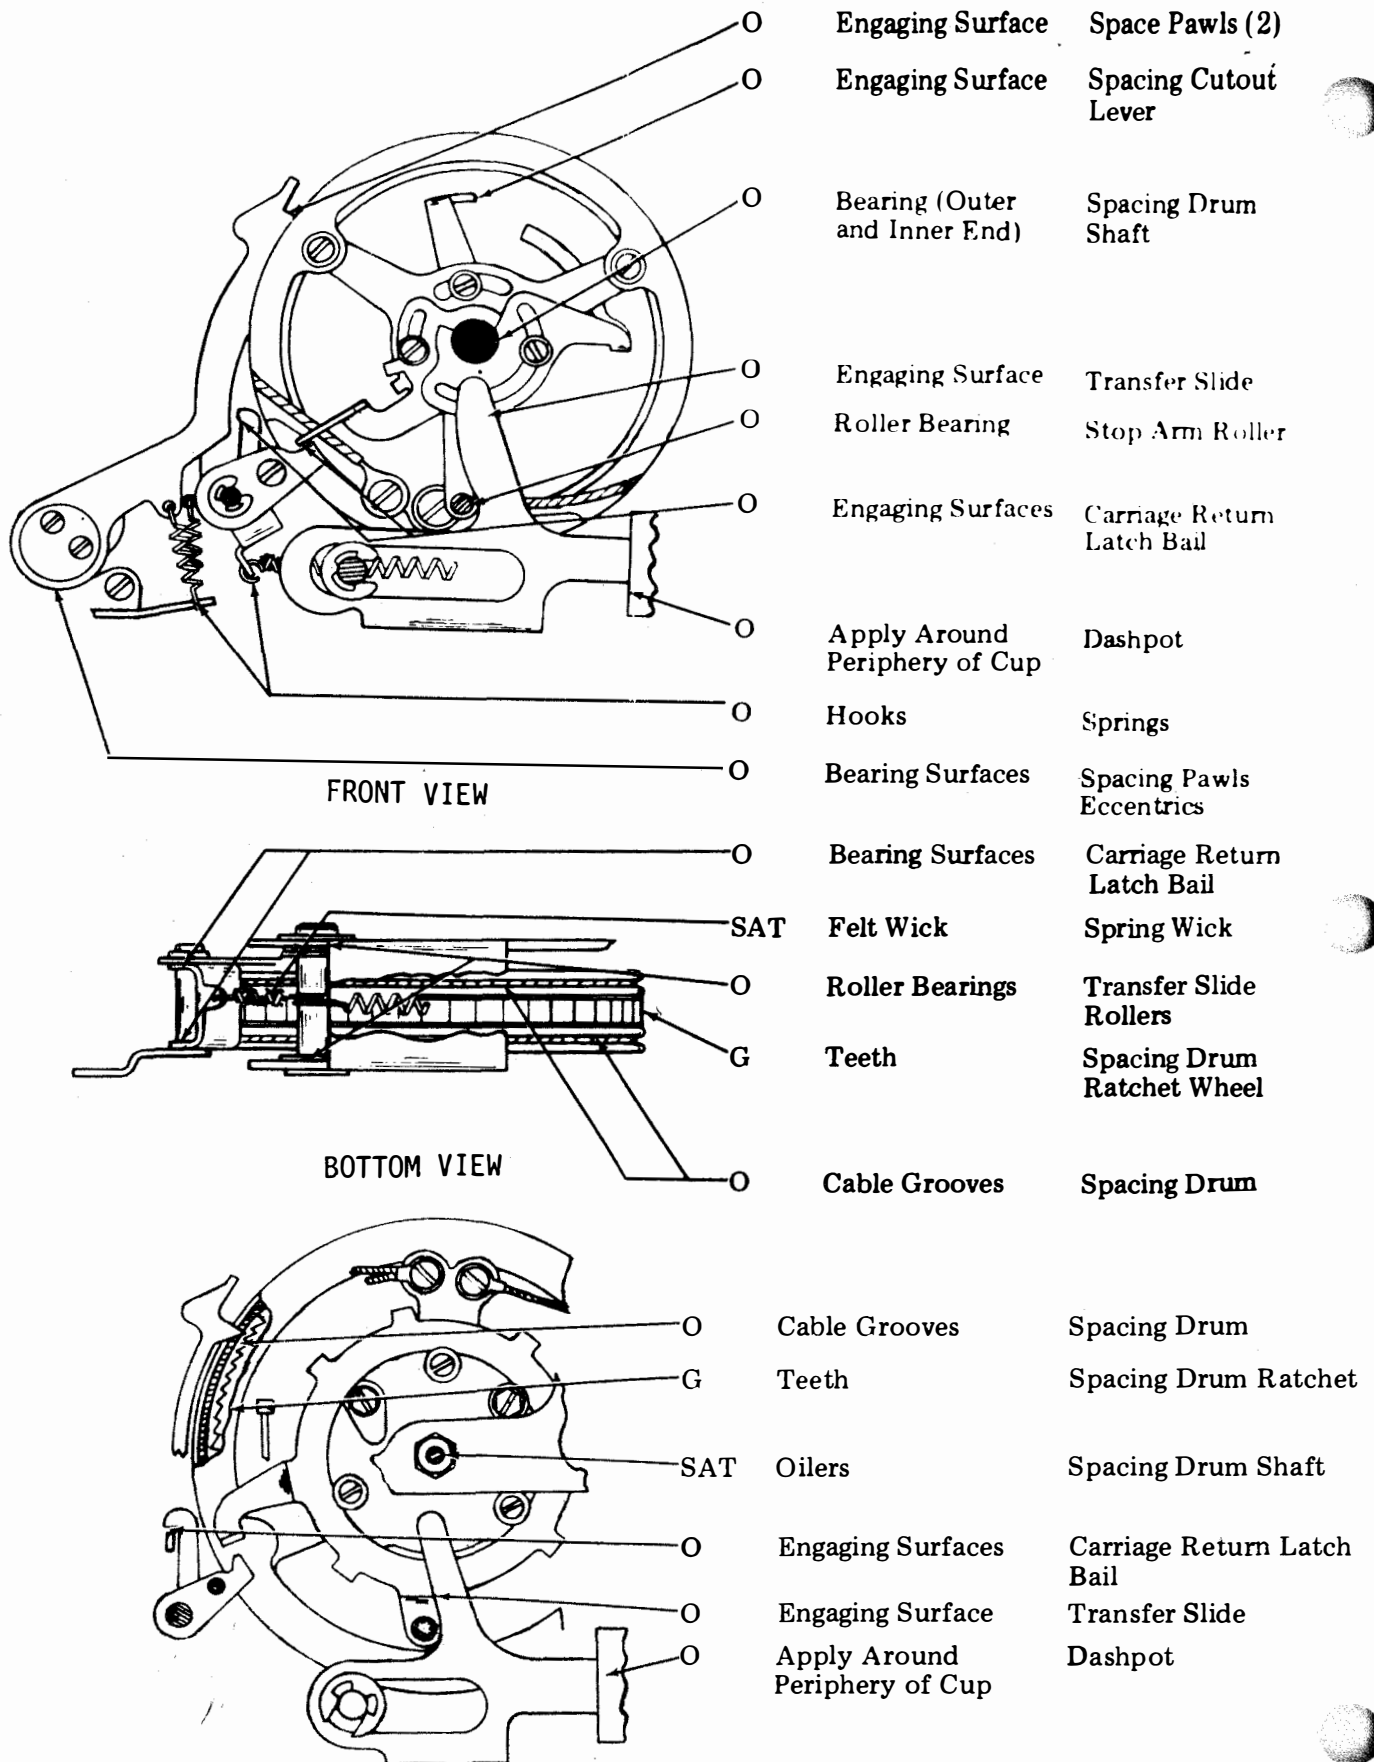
Spacing Drum Drive Mechanism, (Late Model)
